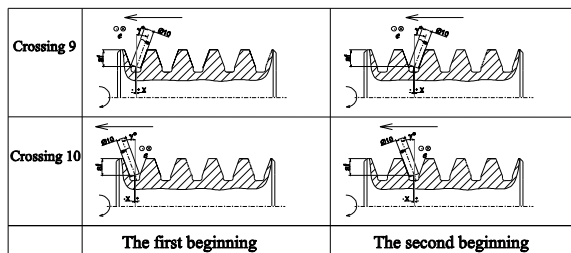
Finishing of the flanks with frontal-cylindrical milling tool  $\varnothing$  10 mm
